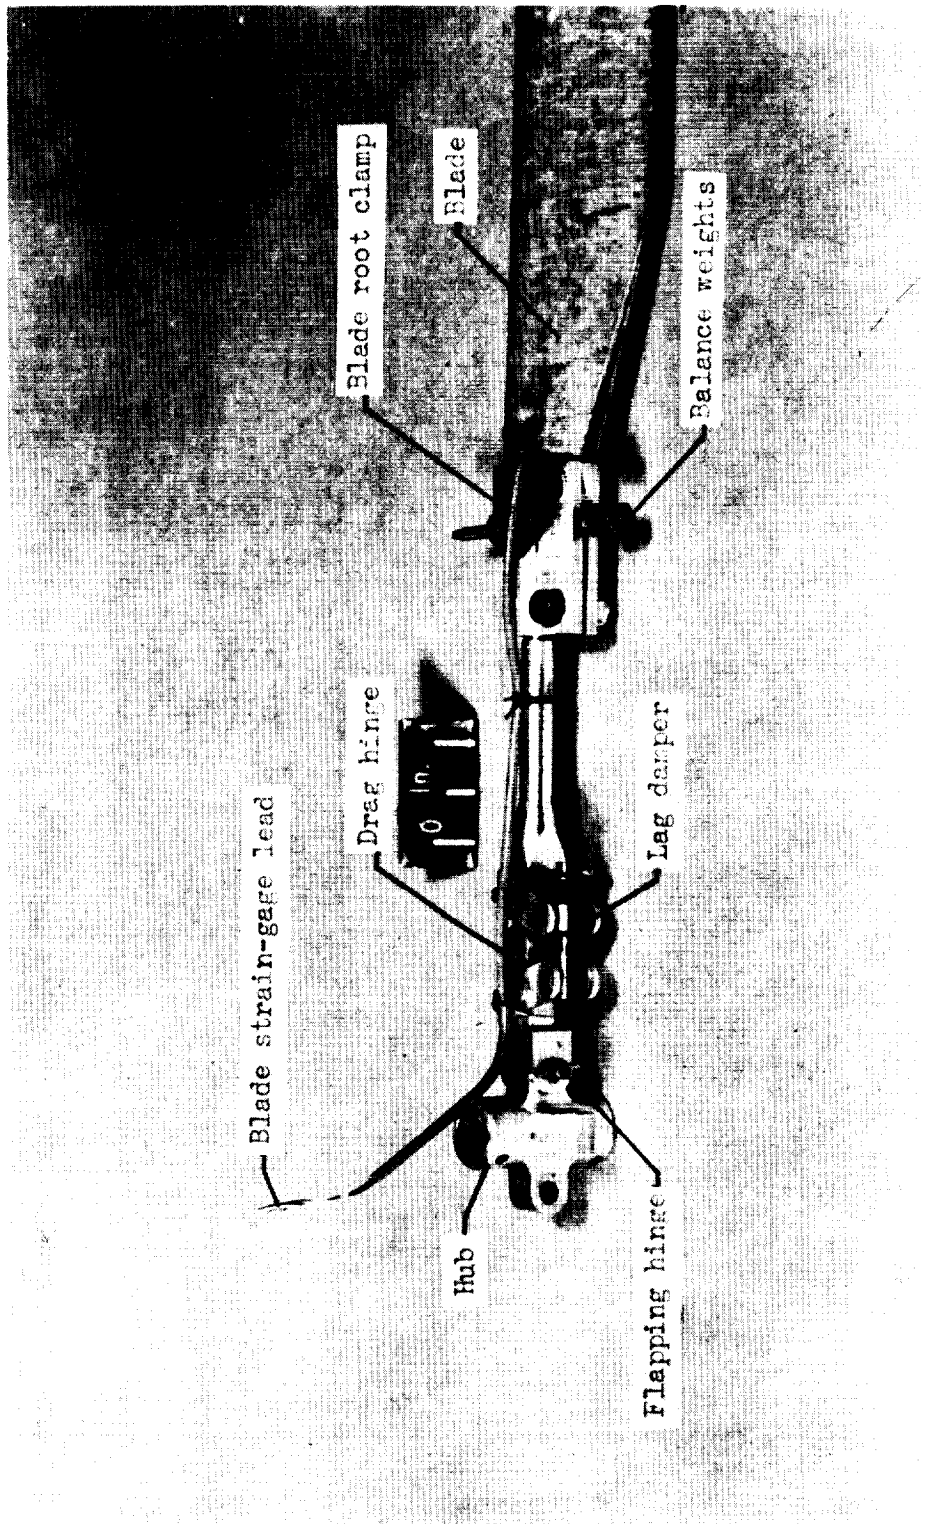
Hub and inboard section of rotor blade. L-95200.1
